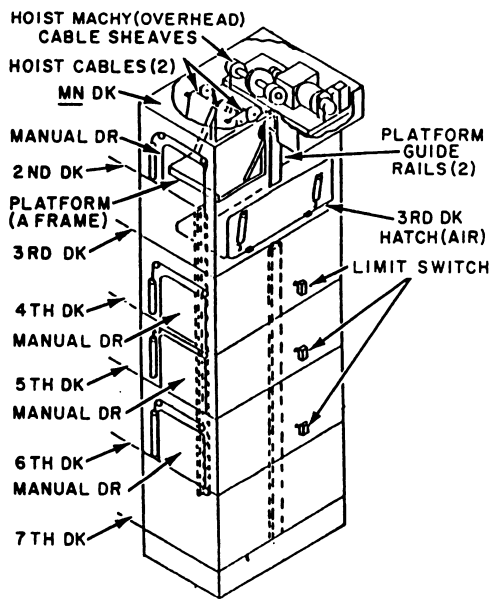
Typical 5,000-pound lower-stage weapons elevator.
